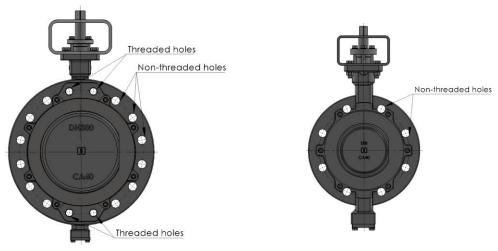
Dimensions of fasteners for valves with DF (Double Flange) type bodies
